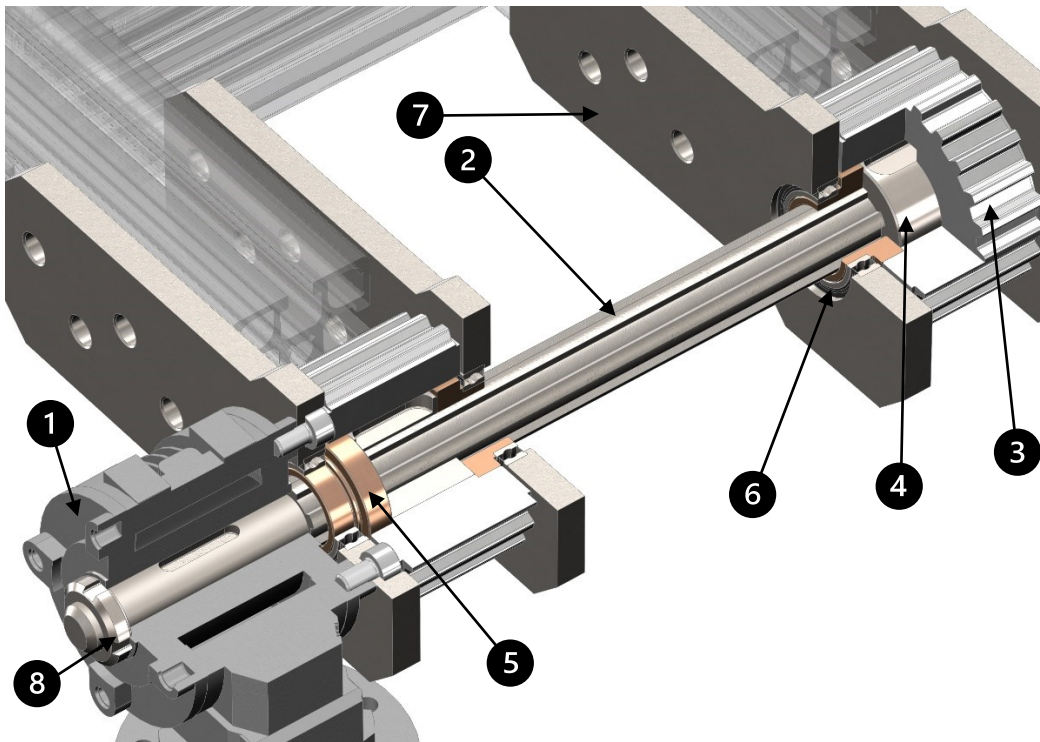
Timing belt drive unit. (1) Gearmotor. (2) Splined shaft. (3) Timing belt pulley. (4) Splined hub. (5) Bearing seat hub. (6) Ball-bearing. (7) Mounting bracket. (8) Locking nut.
